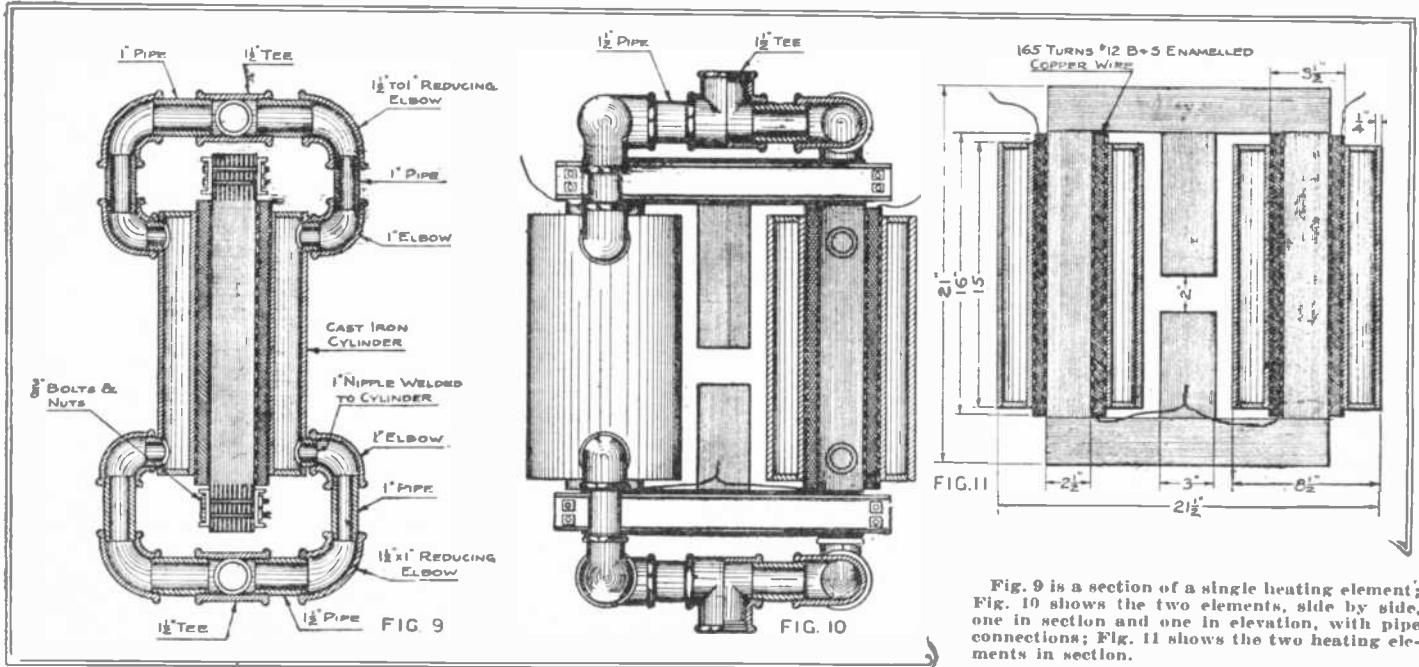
is a section of a single heating element; Fig. 10 shows the two elements, side by side, one in section and one in elevation, with pipe connections; Fig. 11 shows the two heating elements in section.
